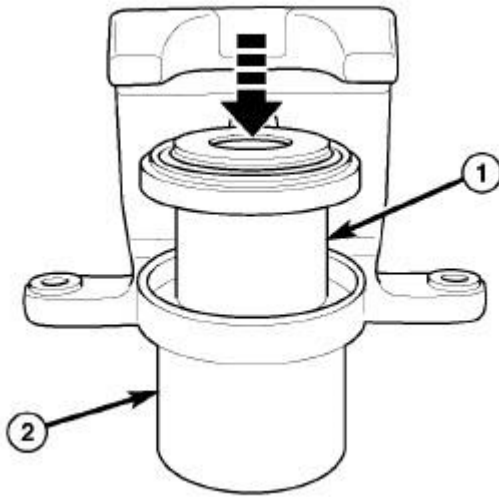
INSTALL BOOT ON CALIPER PISTON
